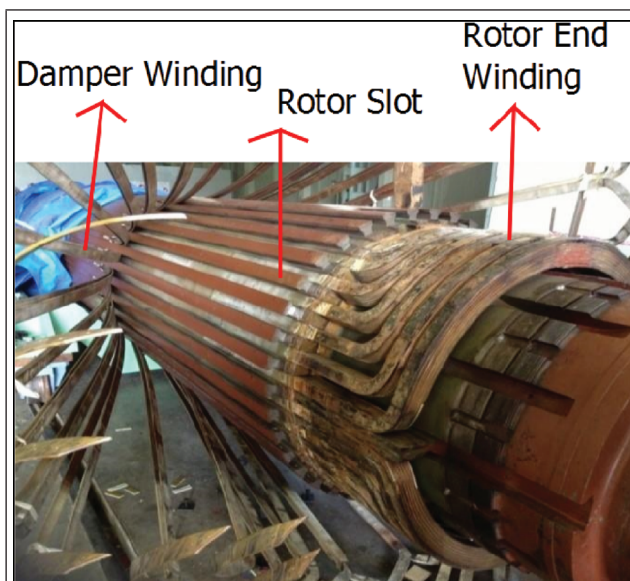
THE PICTORIAL VIEW OF ROTOR STRUCTURE SHOWING END WINDING AND ROTOR SLOTS
